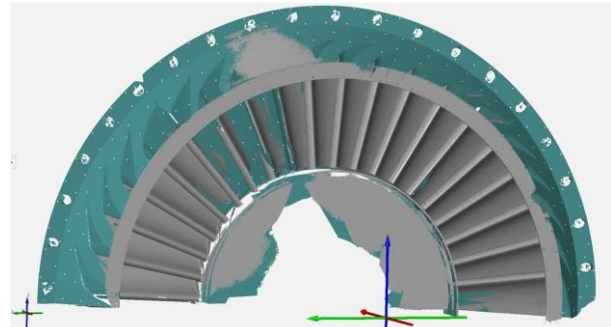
Actual geometry of upper half of nozzle diaphragm, after complete welding
